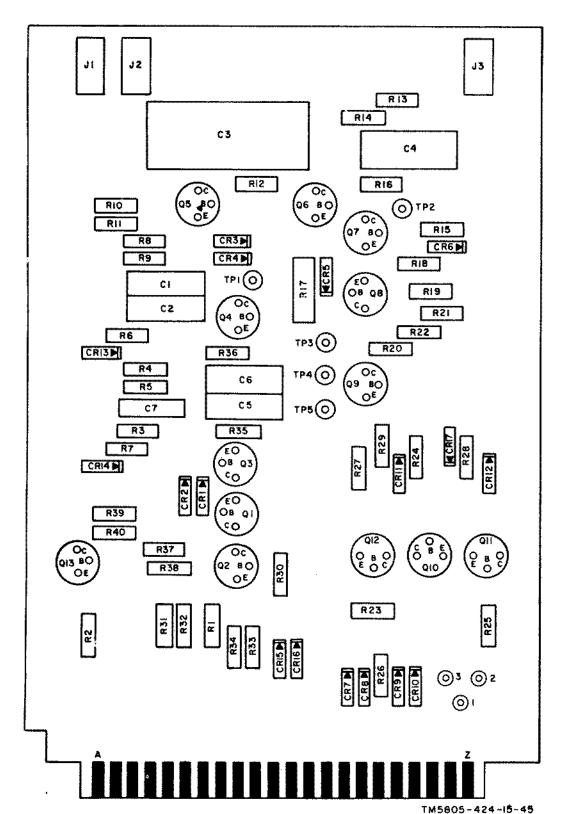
Printed-circuit card assembly A12 (PC 80034060), component location diagram.
